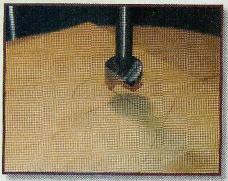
Drill out the hole for the handle with a 1-1/8" multi-spur bit in the drill press.
